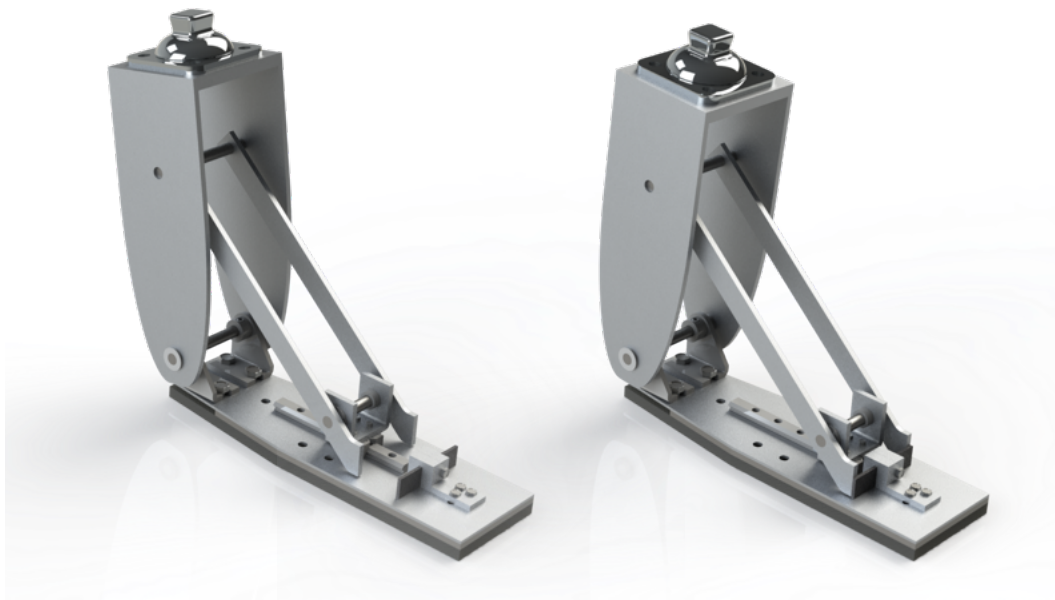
Toe spring assembly, showing toe cantilevers in resting position (left) and toe cantilevers engaged by ankle rods (right).
